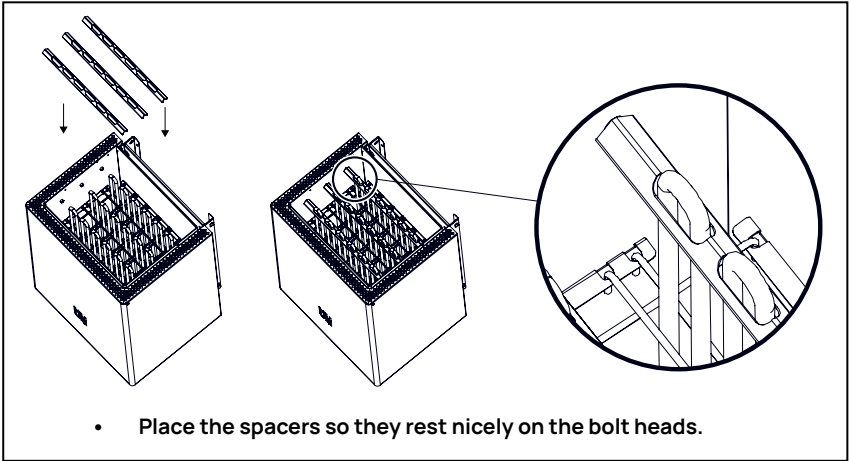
Installation of the HUUM CORE Wall and CORE Wall Combi heating elements spacer.
